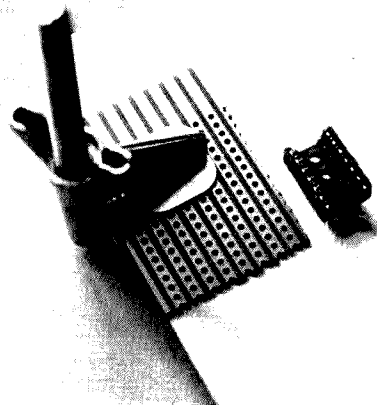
A "mask" can be used as a drill guide for any special pattern. In this case, a piece of perforated board stock is used as a guide to drill holes for mounting an IC socket.
